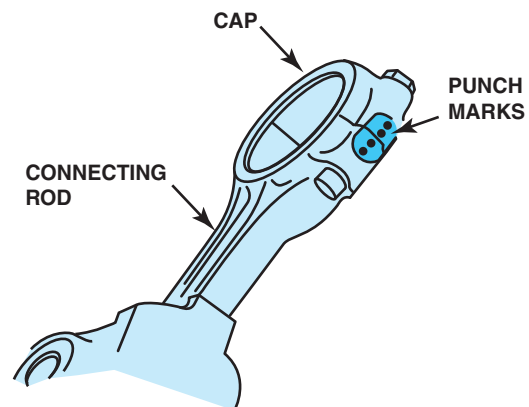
Punch marks on connecting rod and rod cap to identify their location in the engine. The cap and rod were machined together and must remain together.
